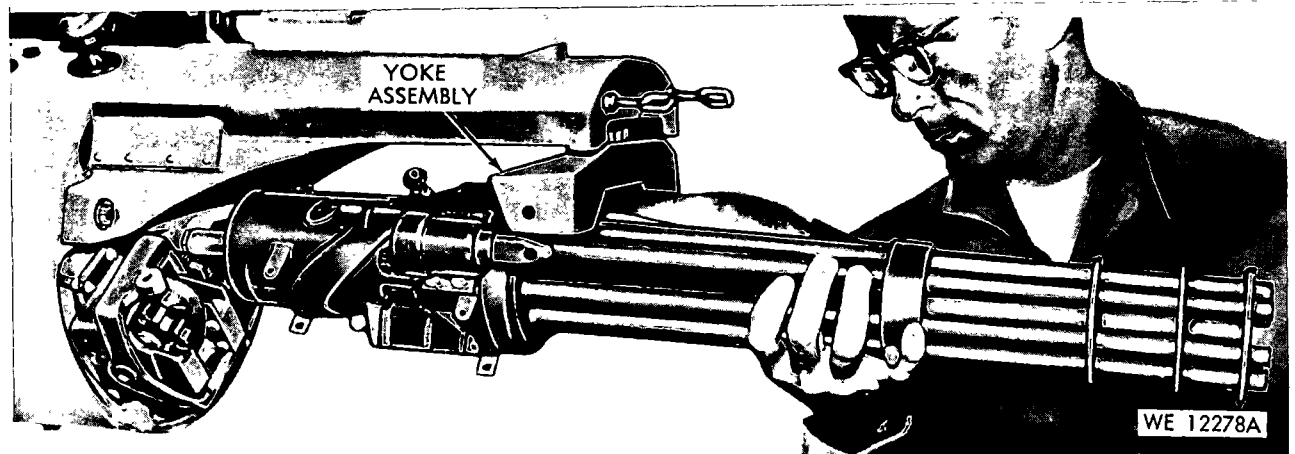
Alining recoil adapter assemblies with mating holes in yoke assembly.
